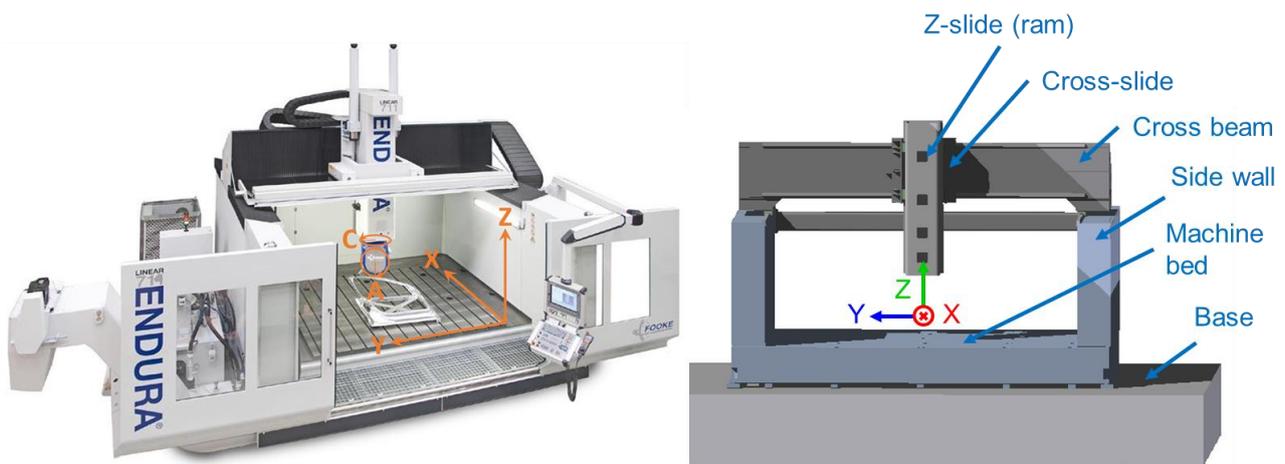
Exemplary five axis overhead gantry type milling machine ENDURA 700 linear
